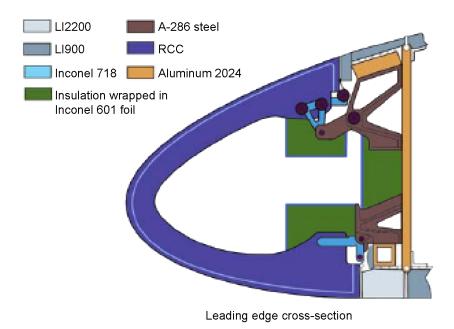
Schematic showing RCC wing leading edge panel and attachment hardware to wing bulkhead.
